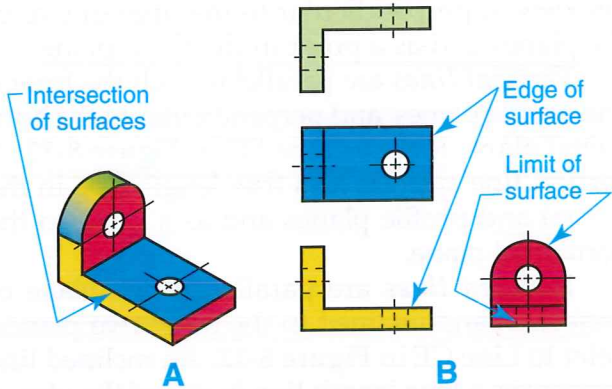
Lines can represent the intersections of surfaces, the edges of surfaces, or the limits of surfaces.
